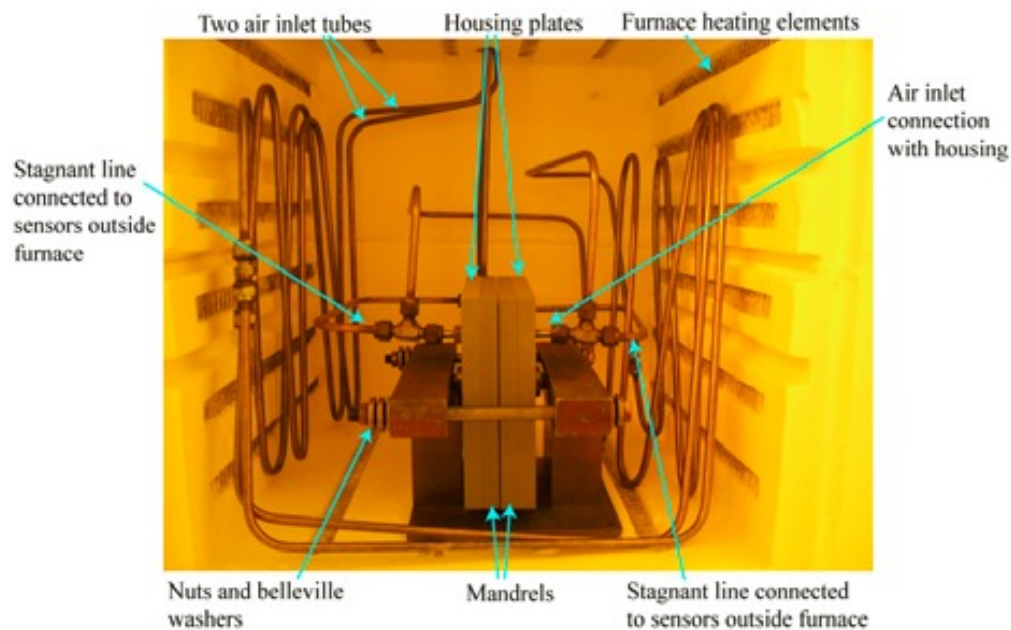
Akilian's air bearing glass shaping tool (vertical configuration).
